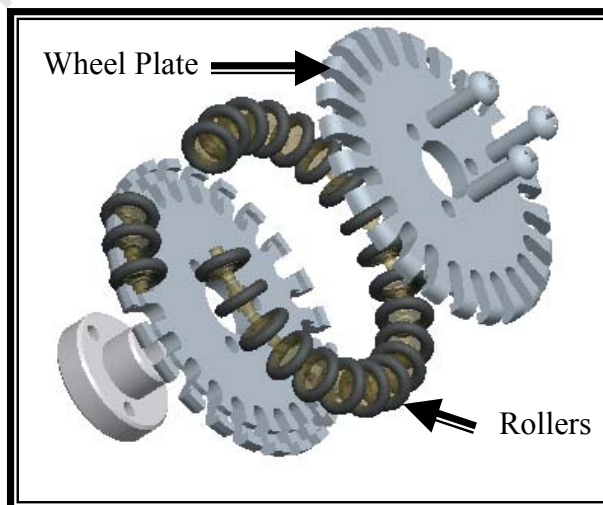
Exploded view of omnidirectional wheel designed by Mr. Bamber
